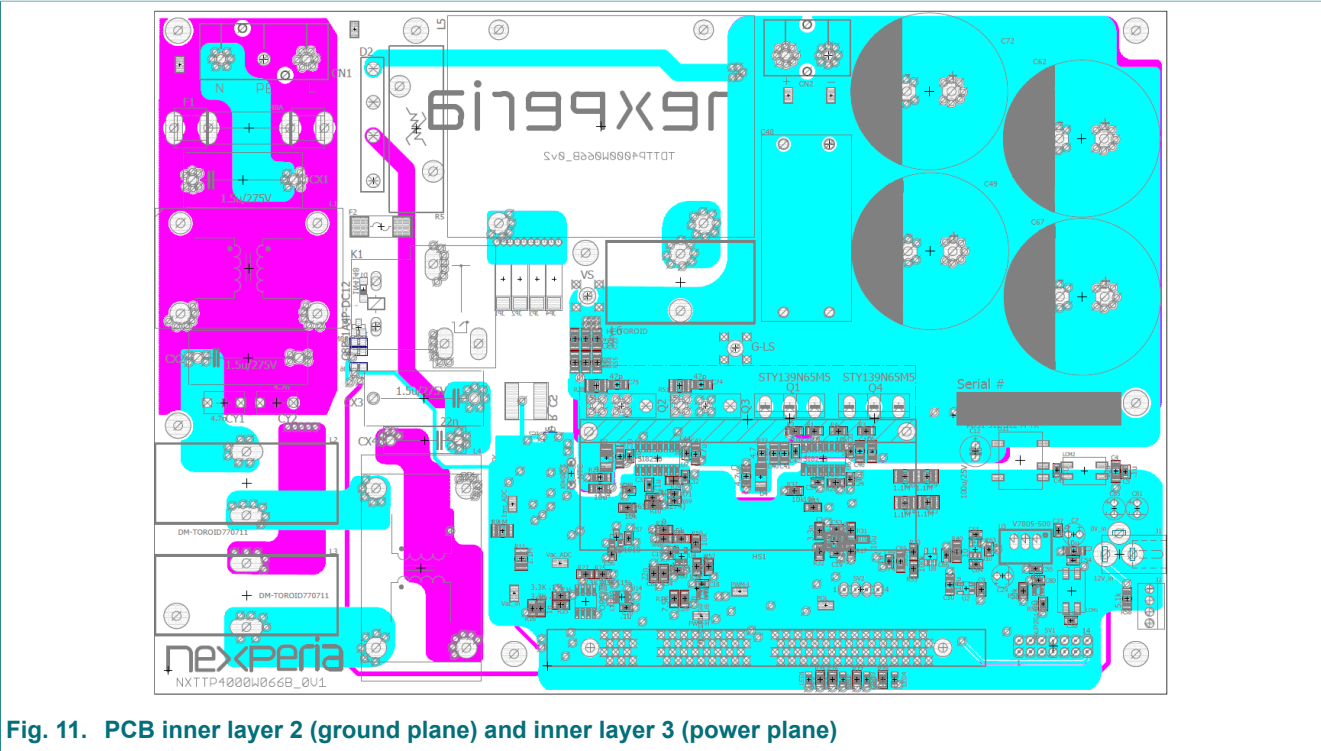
PCB inner layer 2 (ground plane) and inner layer 3 (power plane)
